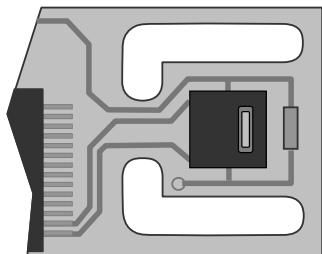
Top view of example of mounted SHT2x with slits milled into PCB to minimize heat transfer.
